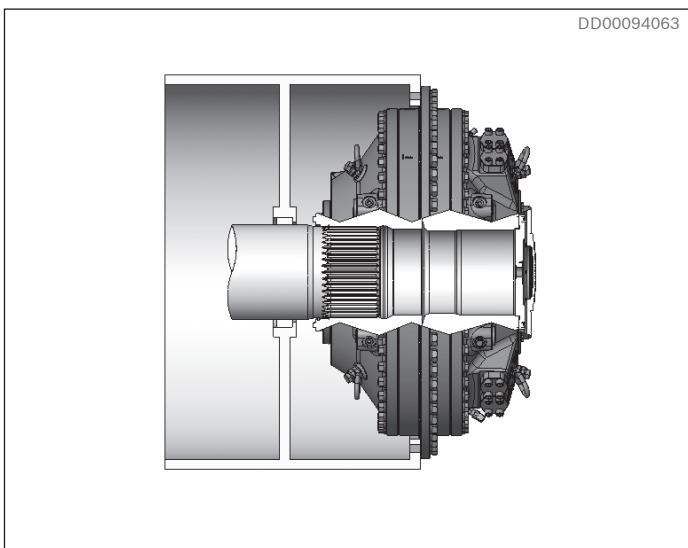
Flange mounted motor with splines and low radial load from driven shaft.
